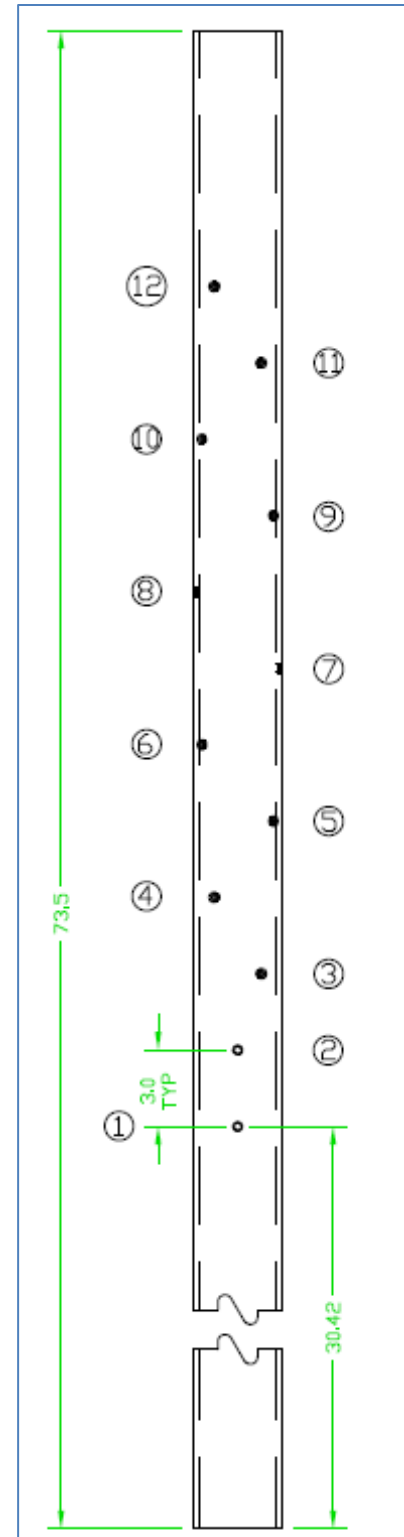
The placement and locations of the coupons in pipe section 5 are shown on the drawing. Dimensions are inches.
